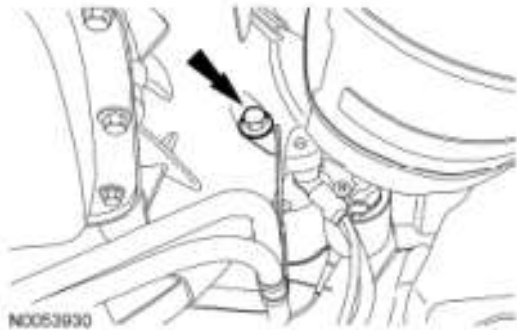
Locating Dual Converter Y-Pipe Bolts
